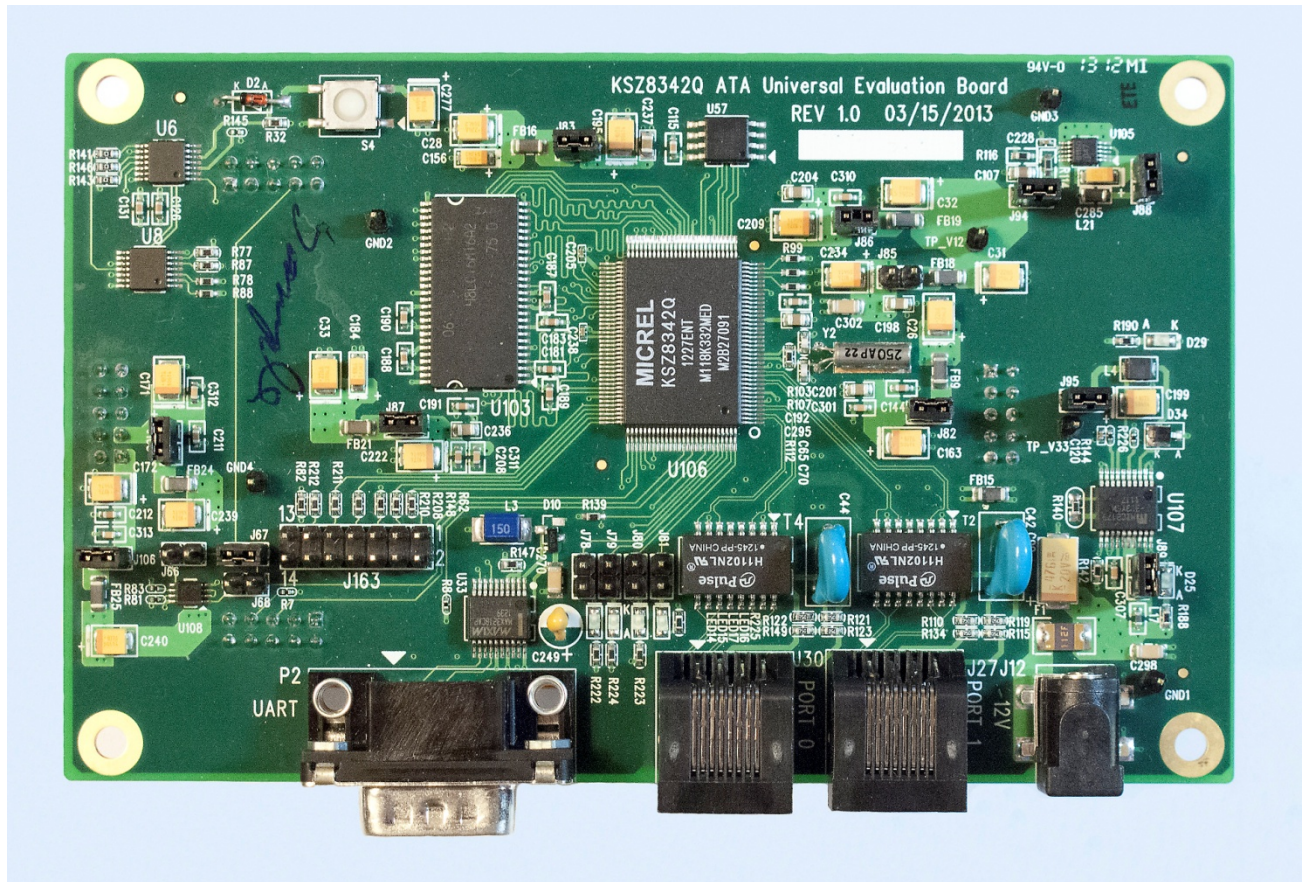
Layout View of the KSZ8342Q Universal ATA Evaluation Board
